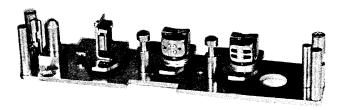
5 4 -TRACK STEREO HEAD ASSY.
